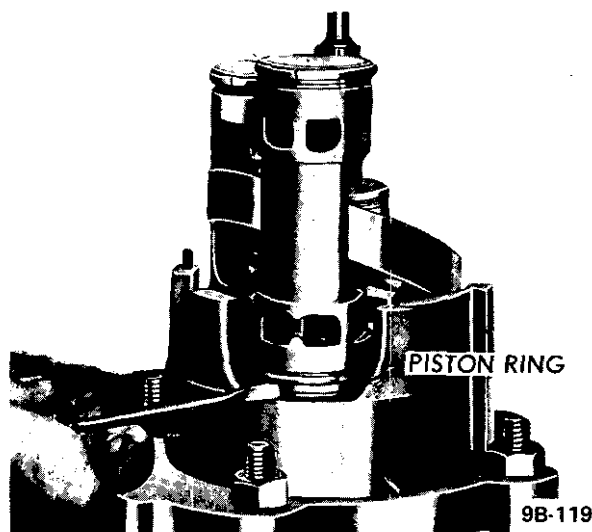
B-147 Compressing Front Piston Rings - Service Pistons
